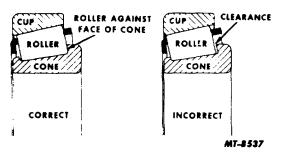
Roller Bearing When Correct Adjustment is Obtained
